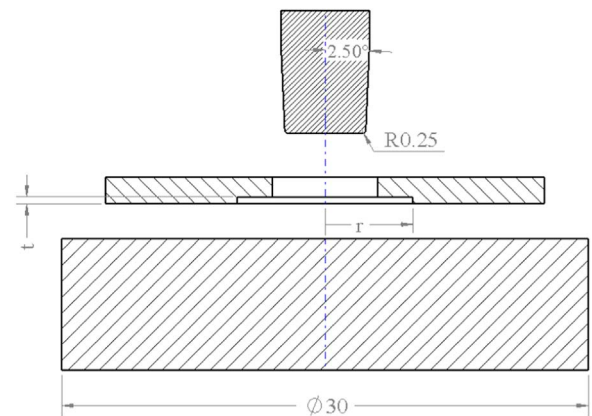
A 2D drawing of die-less clinching tools showing fixed and variable dimensions of punch, blank holder and flat anvil. All dimensions are in mm.
